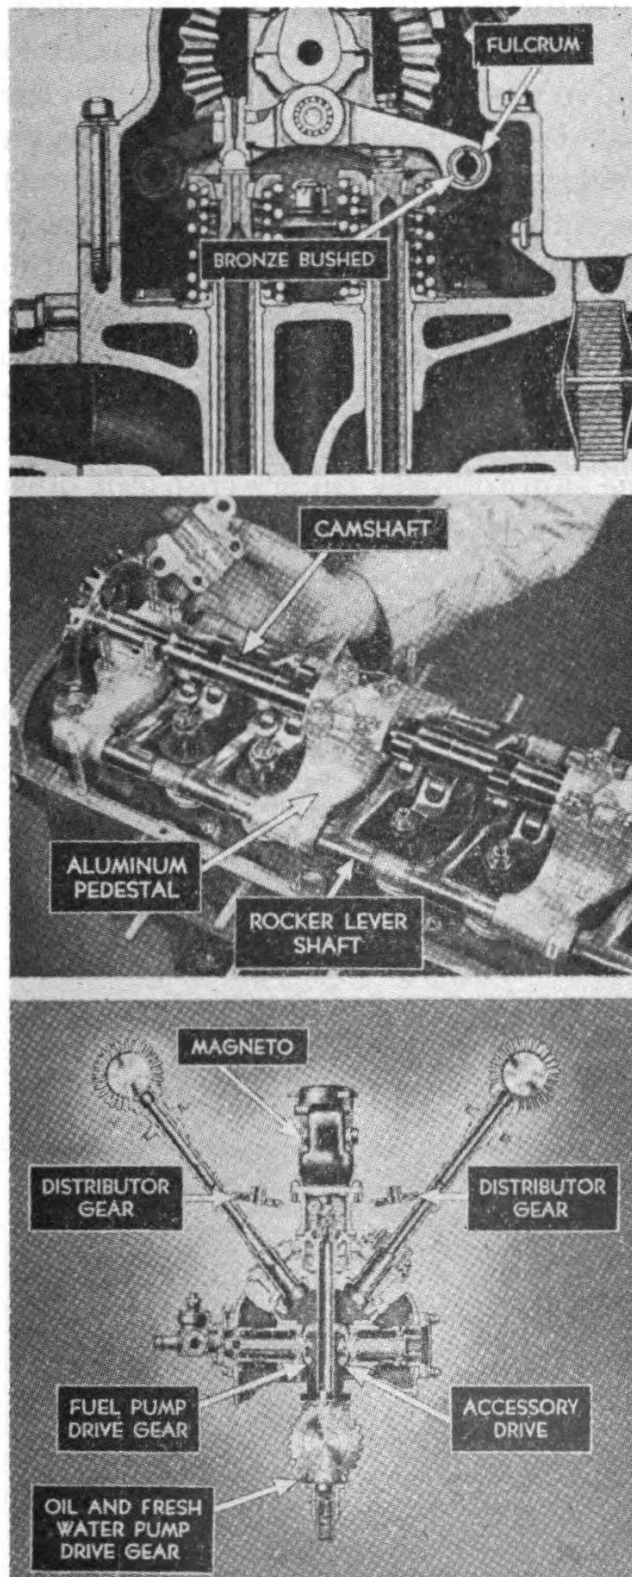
Operating mechanisms of a V-type gasoline engine (Packard).
